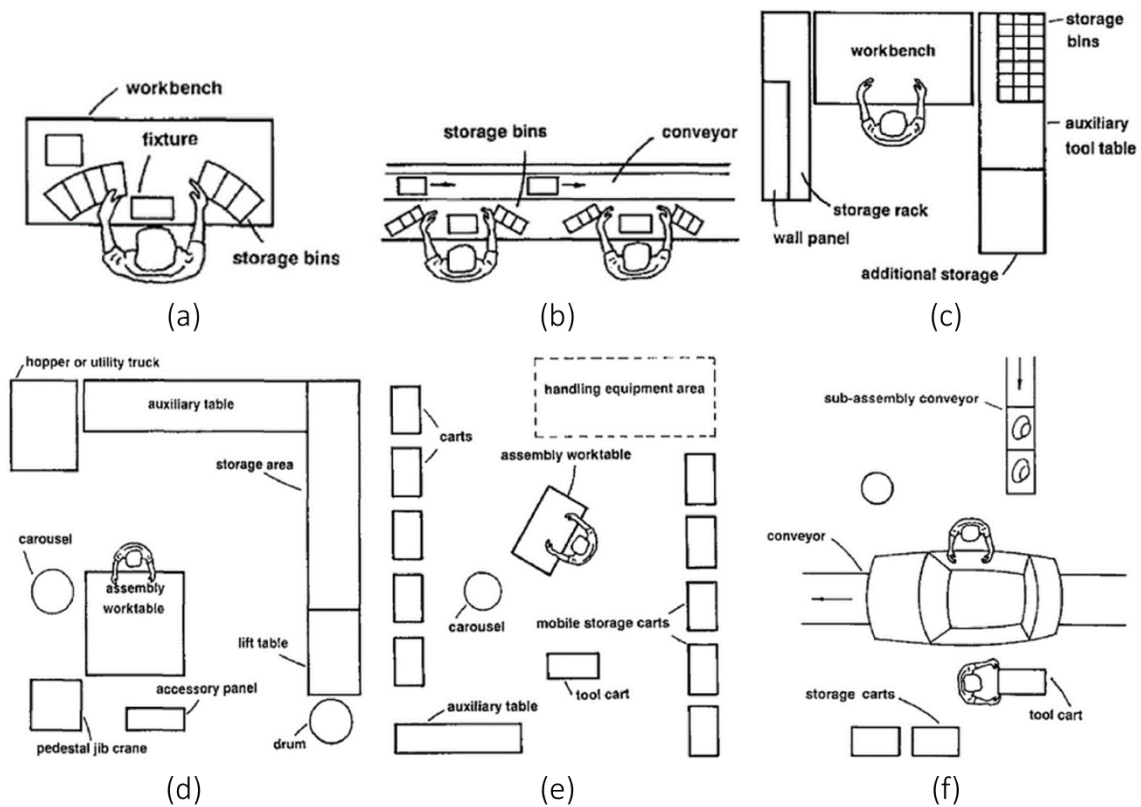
Assembly layouts defined by Boothroyd [29] (small to large scale): (a) Bench layout, (b) multi-station layout, (c) modular assembly layout, (d) custom assembly layout, (e) flexible assembly layout and (f) large multi-station layout. Other assembly layouts not shown are the very small assembly layout (e.g. clean room assembly) and assembly on site.
